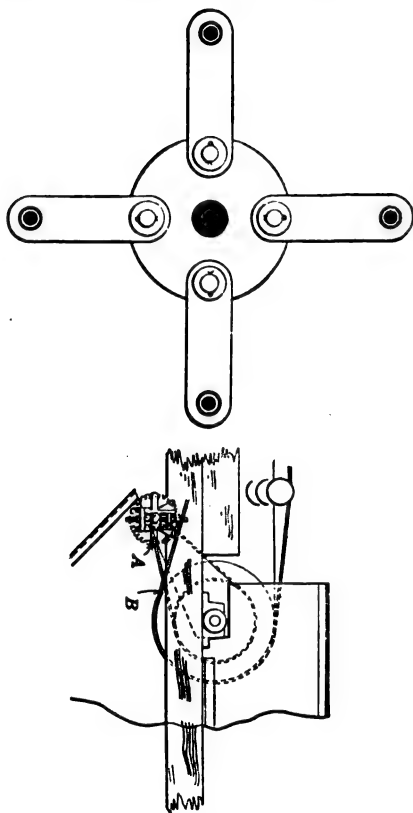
DEVICE FOR CLEANING CONVEYOR BELTS.
